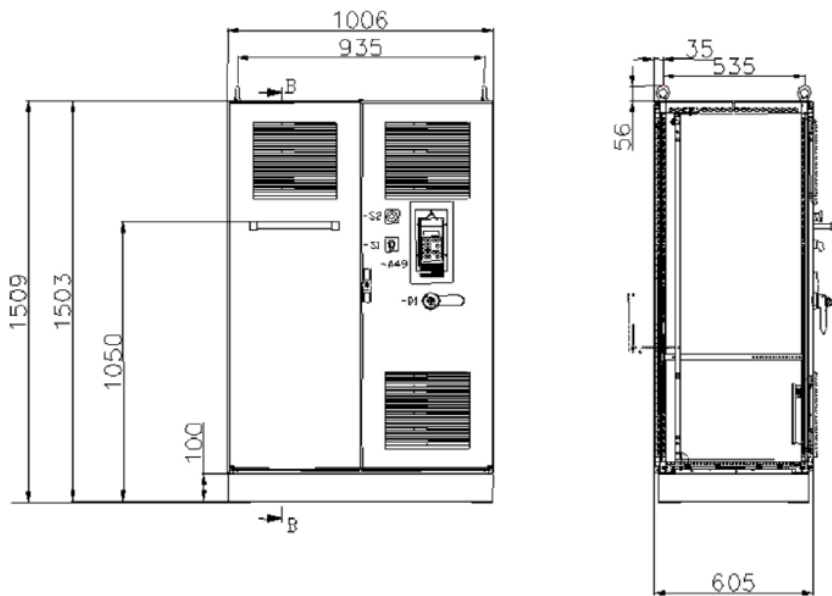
Typical dimensions of one Steering Drive Unit for Azipod CZ
